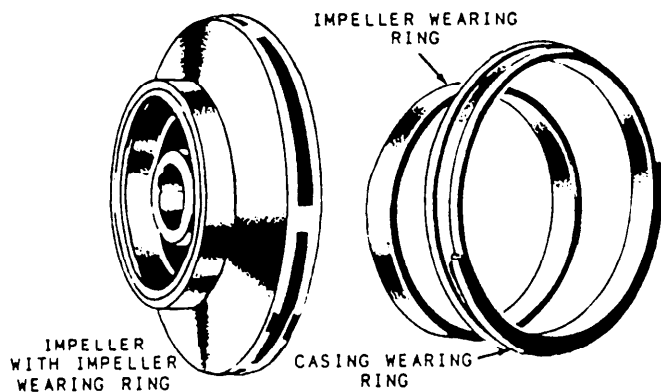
Impeller, impeller wearing ring, and casing wearing ring for a centrifugal pump.
